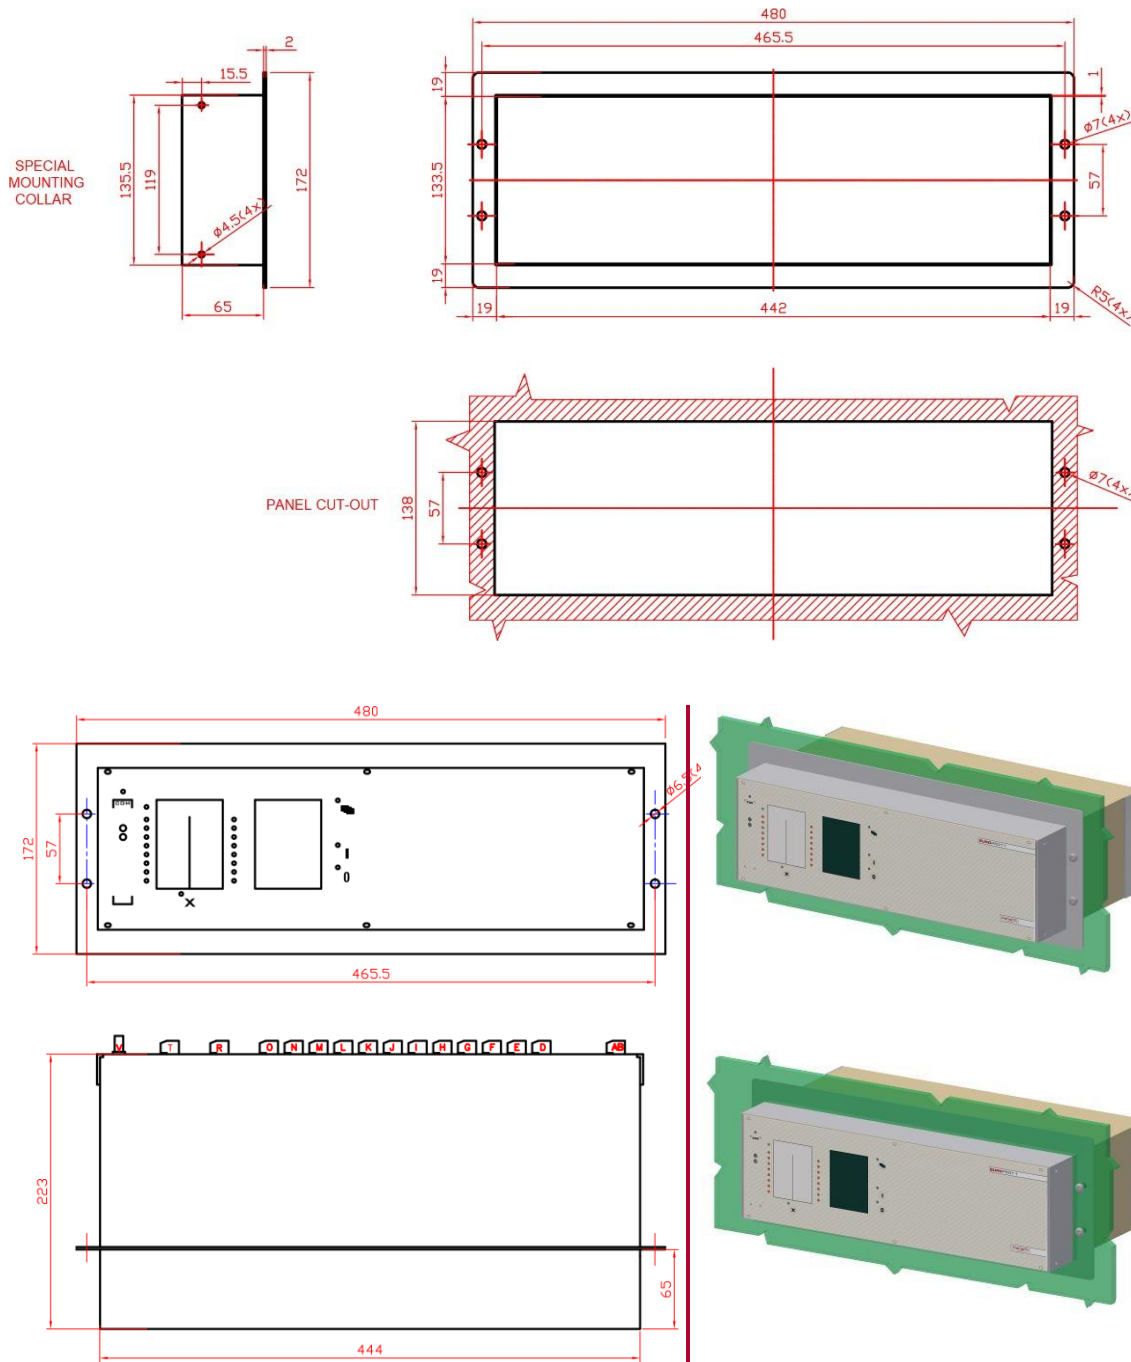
Dimensions for semi-flush mounting of 84 HP single rack with 3D illustration
